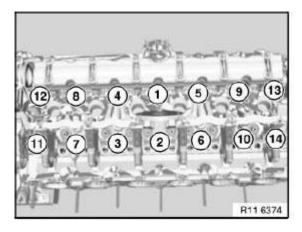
Identifying Cylinder Head Bolts In Sequence Courtesy of BMW OF NORTH AMERICA, INC.
